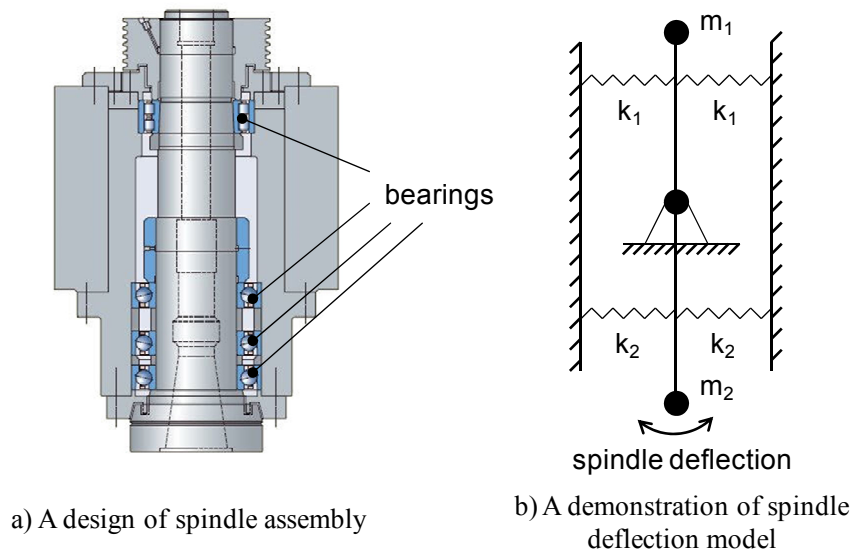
An example of cutter-spindle assembly: a) A design of spindle assembly (www.mycncuk.com), b) A demonstration of spindle deflection model
